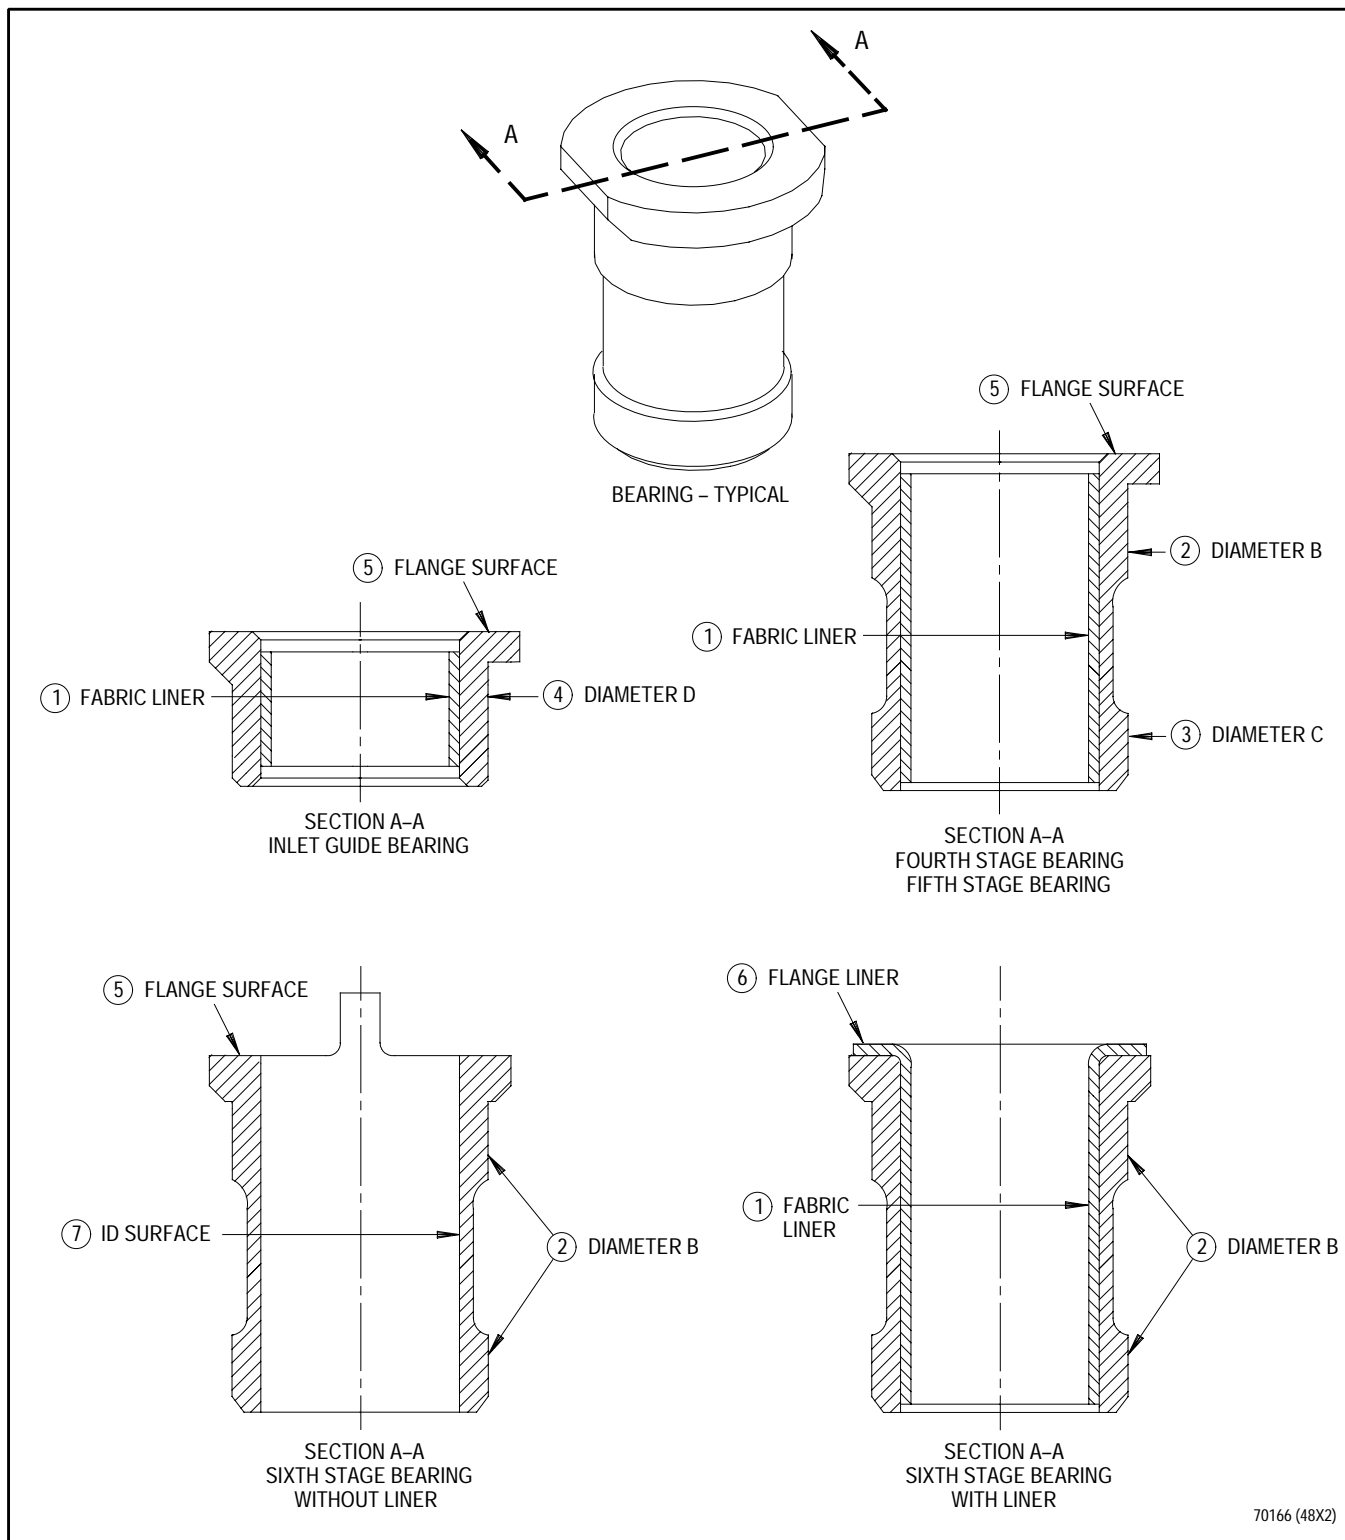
Inlet Guide, Fourth, Fifth, and Sixth Stage Compressor Stator Vane Bearing - Inspection
